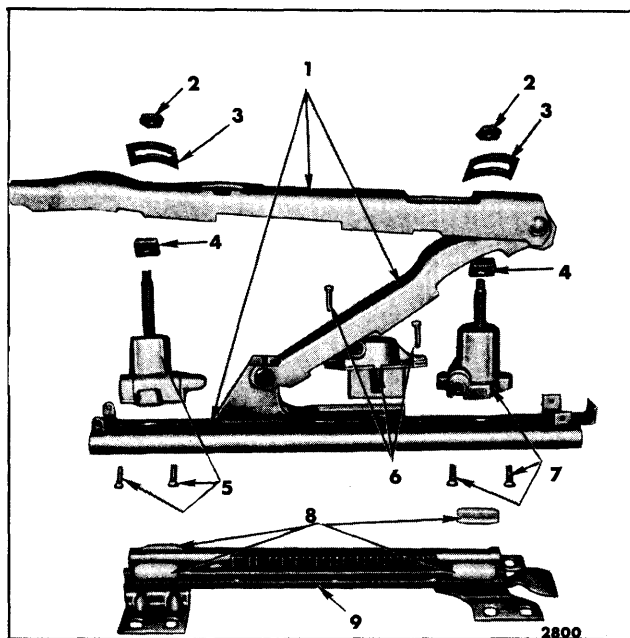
Six-Way Seat Adjuster Components - "B, C & E" Styles
